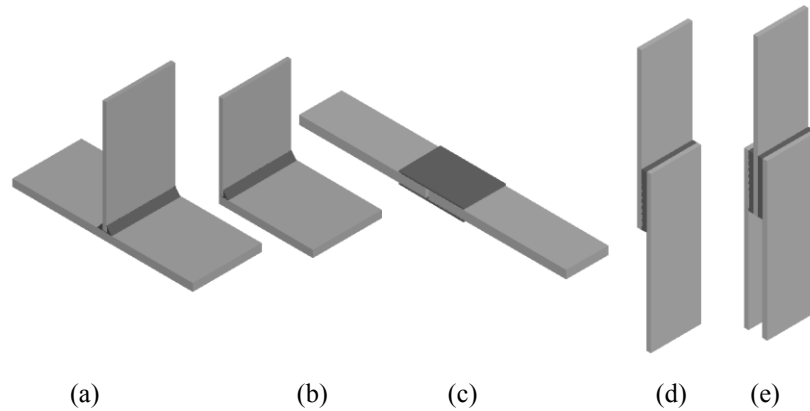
Different types of adhesively bonded joints, (a) T-joint, (b) L-joint, (c) double strap joint, (d) single-lap joint, (e) double lap joint.
